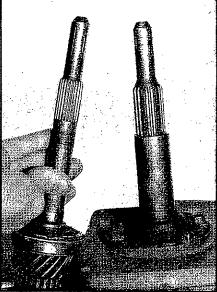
The vast majority of A-833s used the 1"x 23-spline input shaft (left). Hemi boxes used the superbeefy 1-3/6 x 18-spline unit (right). This required a special bearing retainer and release bearing. Both, however, fit the same pilot bushing.
